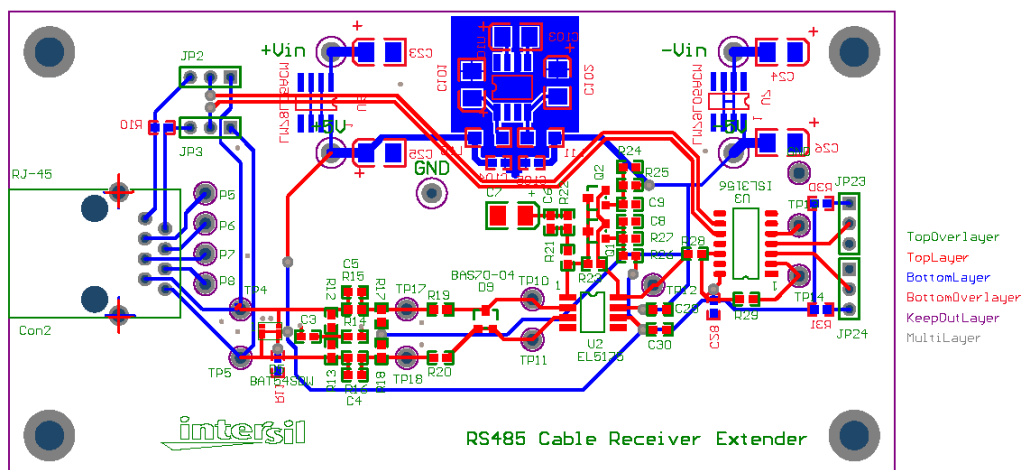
PCB LAYOUT SILK SCREEN TOP LAYER
